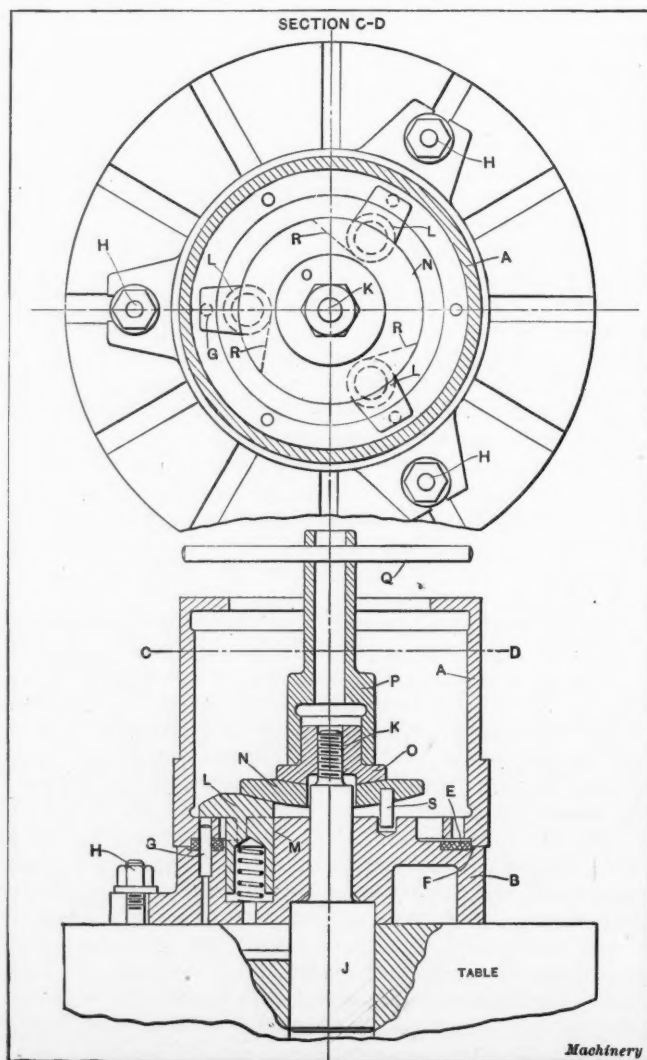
Equalizing Clamping Device used on Vertical Turret Lathe
